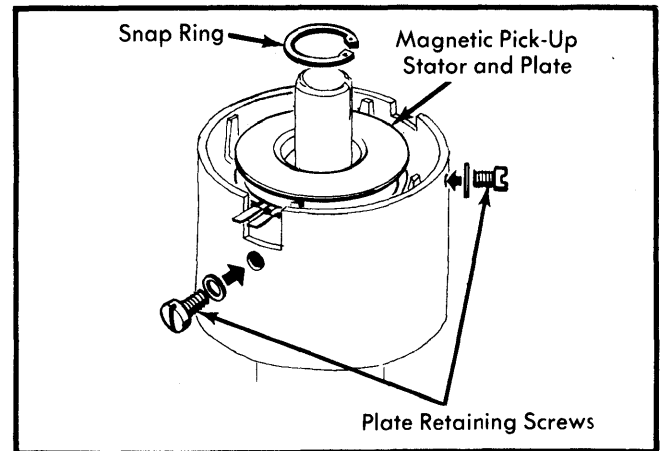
Removing or Installing Pick-Up, Stator and Carrier Plate
